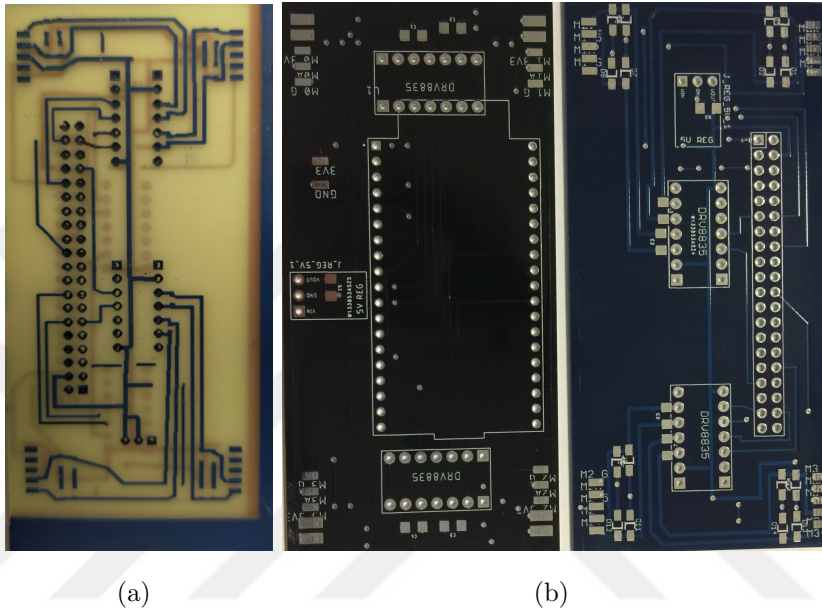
(a) Fabricated PCB in lab by lithography (b) Fabricated PCB by custom-manufacturing by lithography.
